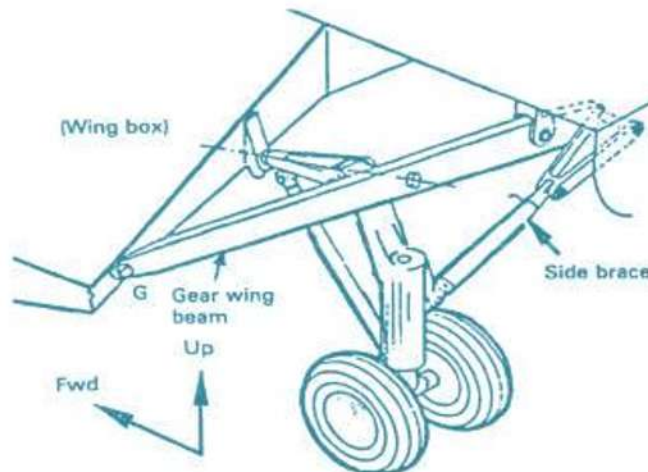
Examples of gear attachment Wing Engine Pylon Attachment
